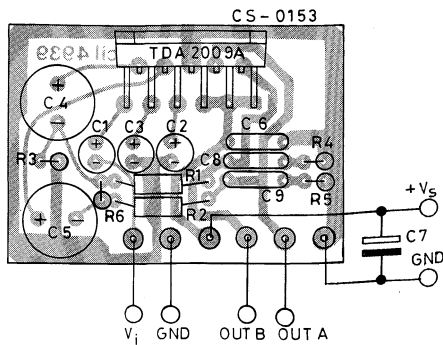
P.C. board and components layout of the circuit of fig. 16 (1 : 1 scale)
